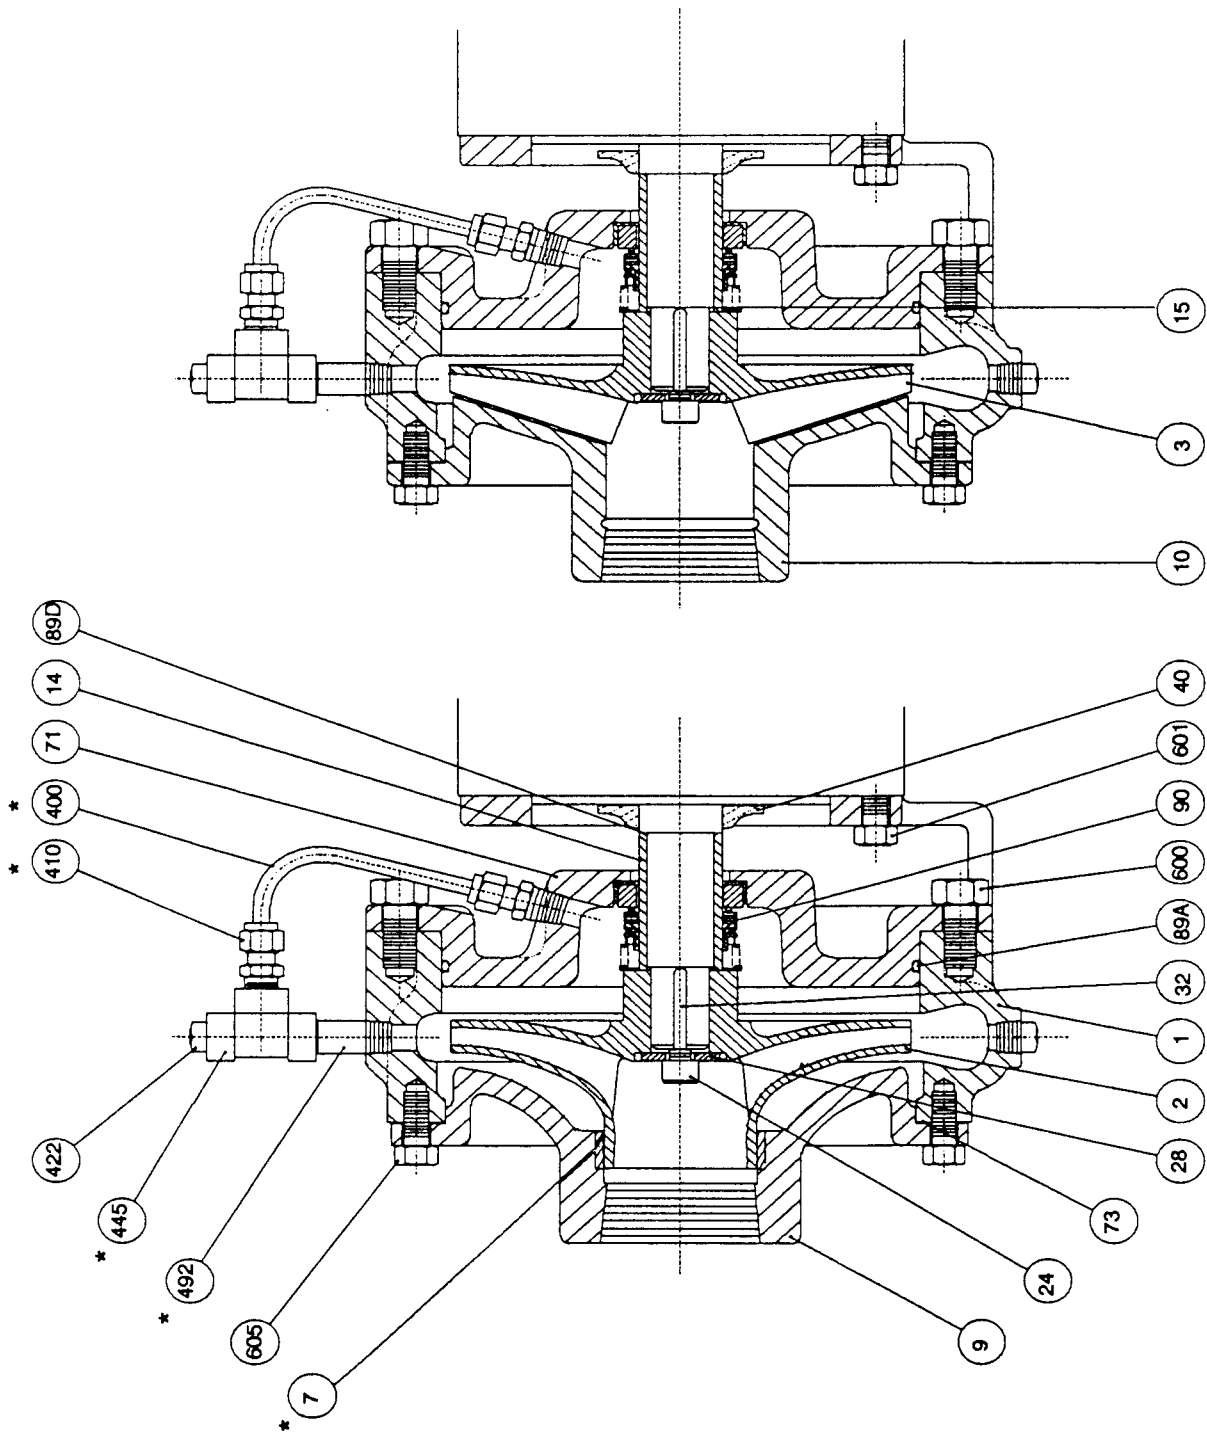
Sectional for Frame Mounted L&H Horizontal Back Pullout Pump
